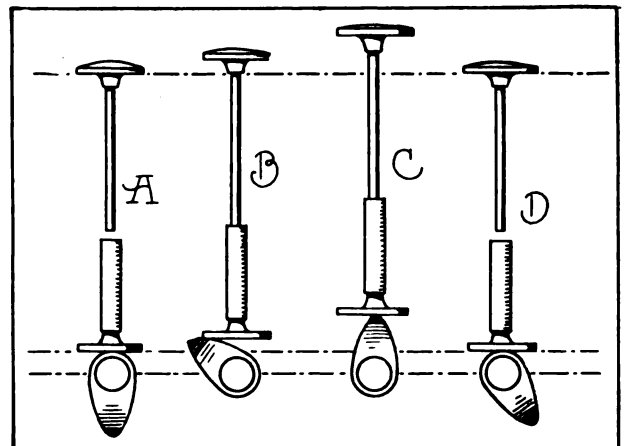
How Cams Actuate the Valves: A, Valve Seated; B, Cam Beginning Lift; C, Valve Fully Open; D, Valve and Cam Inactive.
